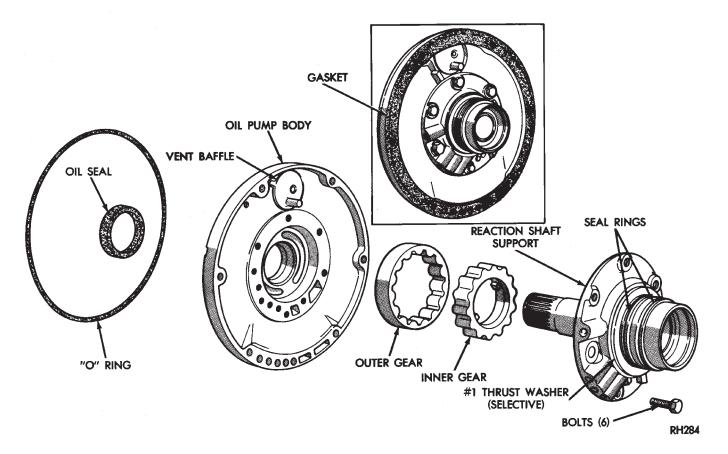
Oil Pump And Reaction Shaft Components—46RH
